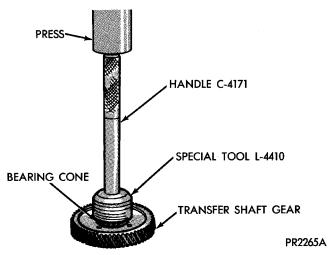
Install Transfer Shaft Gear Bearing Cone
